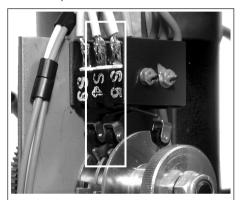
· Switches WE-S4 and WE-S5; switch WE-S6 not installed
